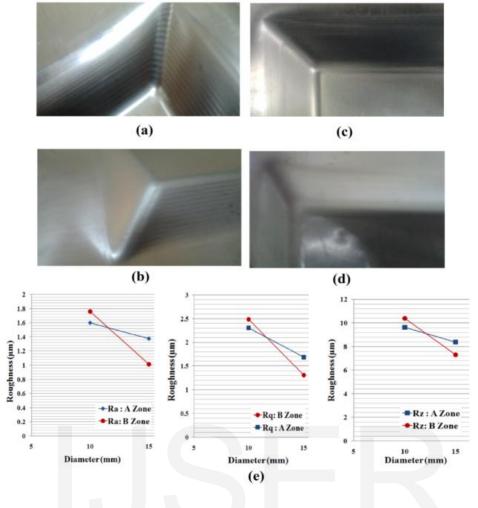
Surface finish of the parts produced by tool diameter tests (a, b) internal and external surface (10 mm); (c,d) internal and external surface (15 mm); (e) roughness parameters (Ra,Rq, and Rz) of internal formed surface.
